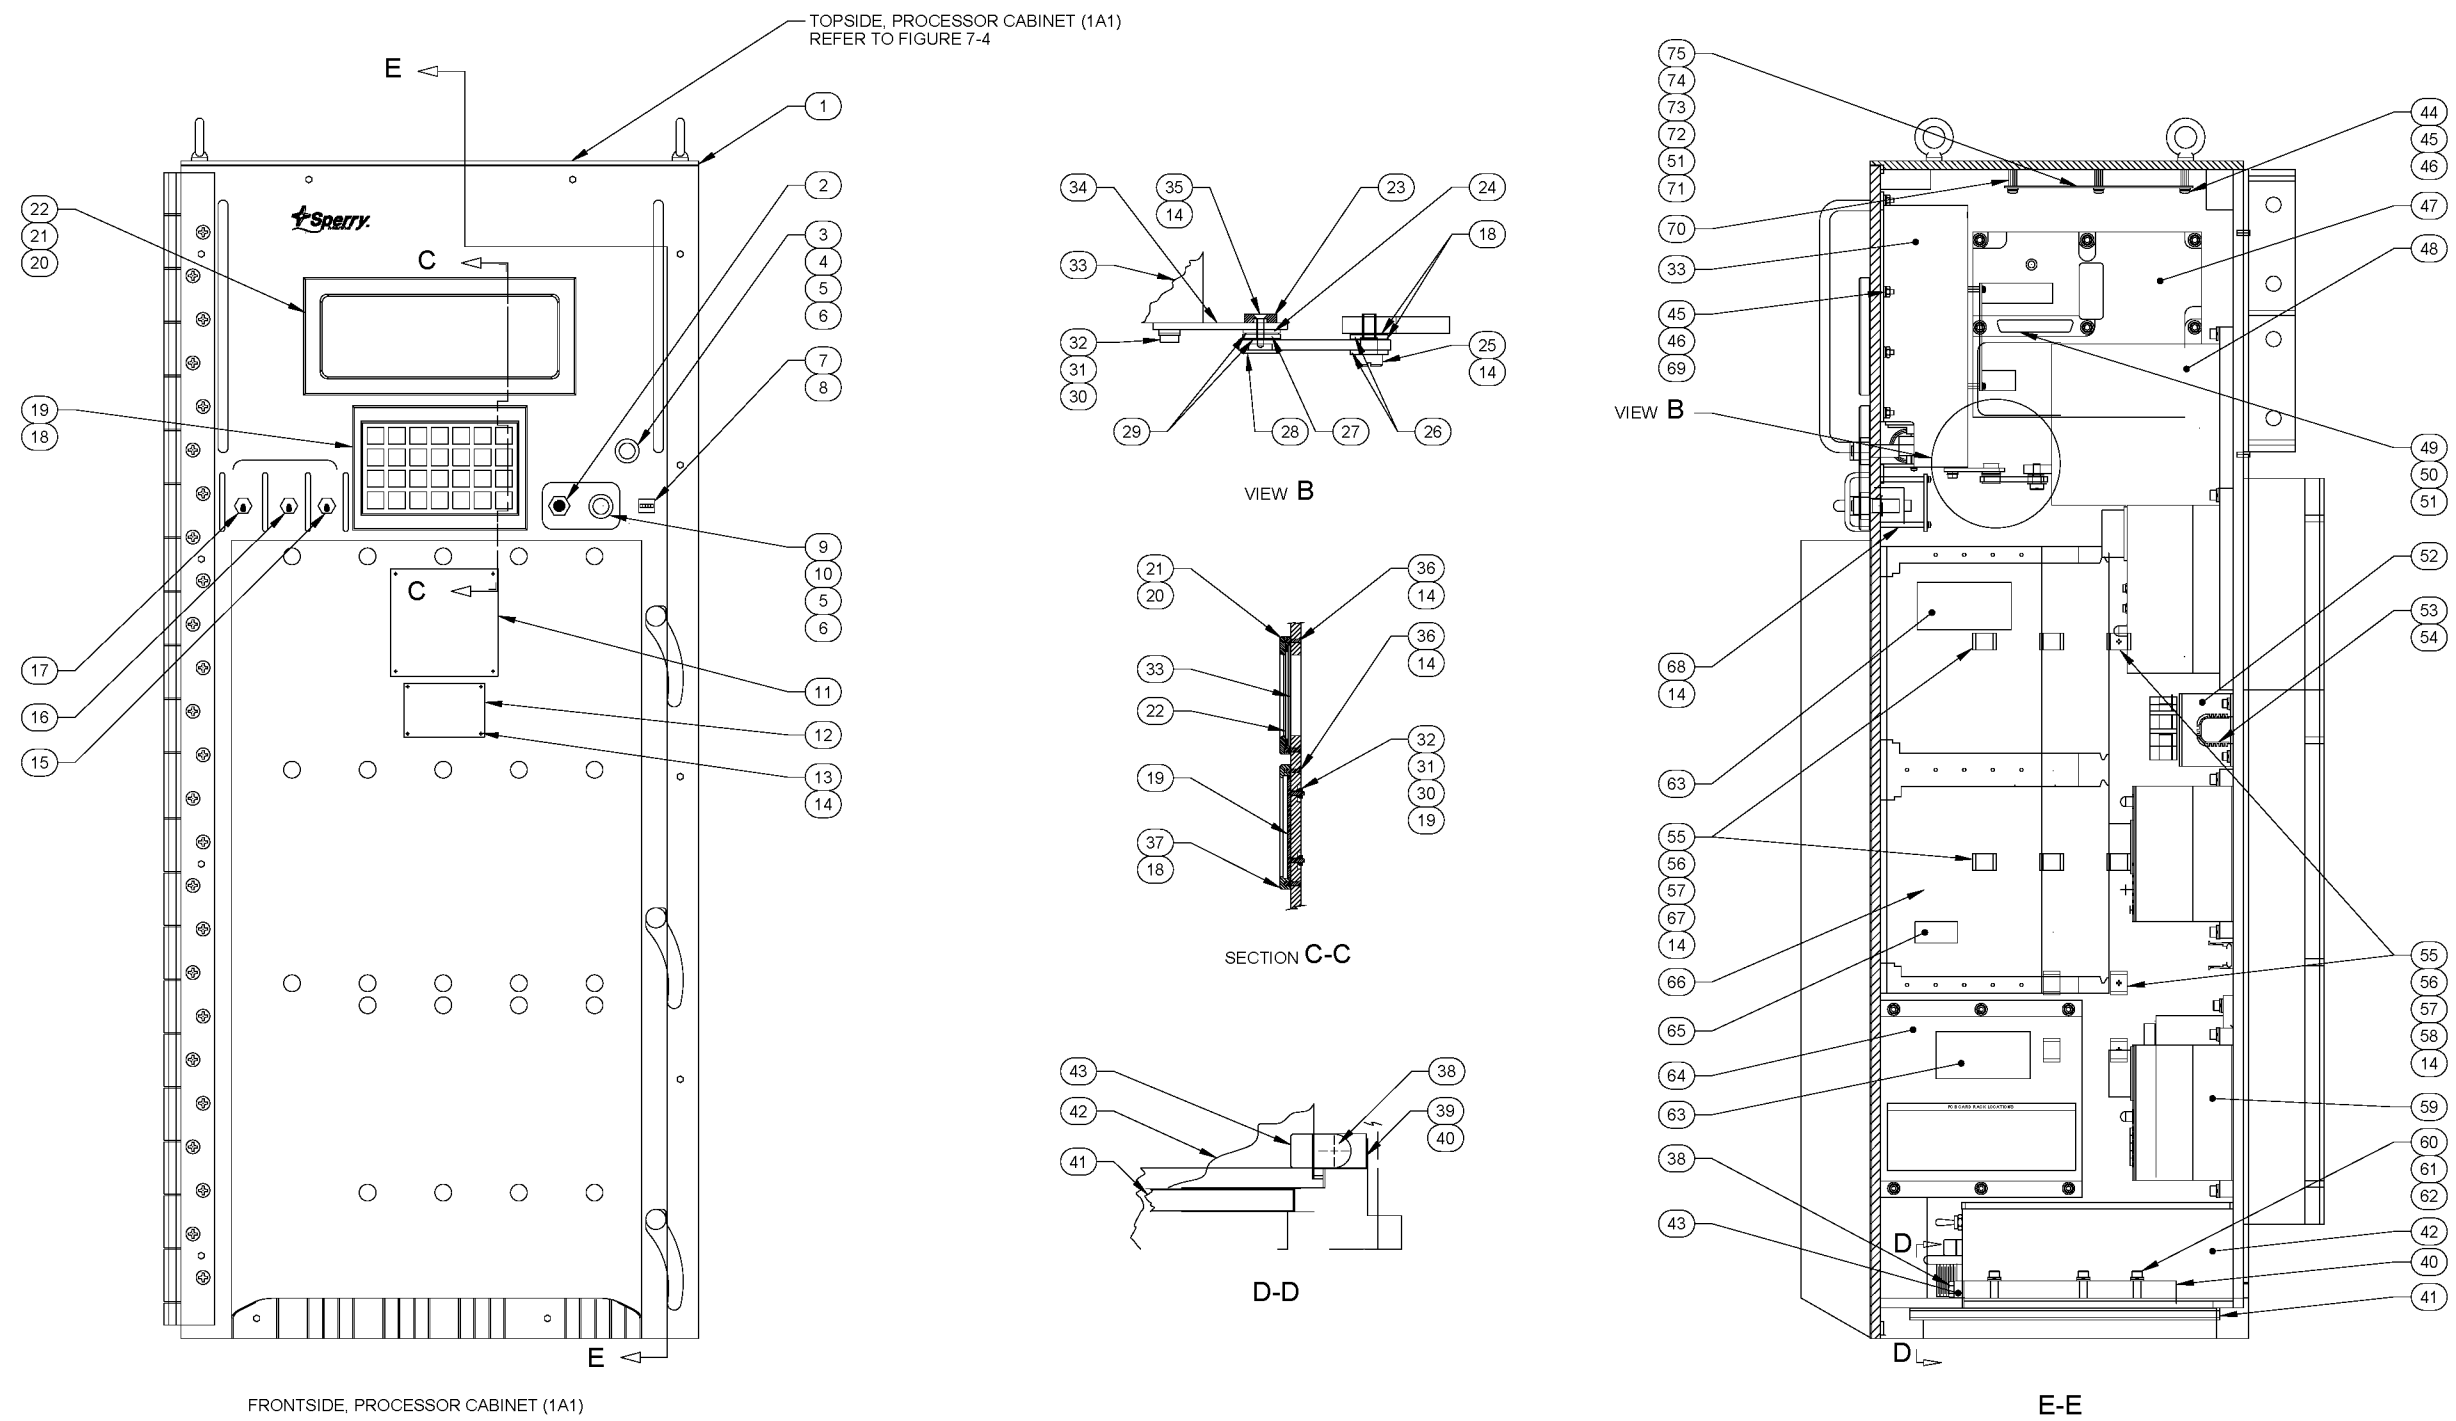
Processor Cabinet Assembly (1A1) (Unit 1)
